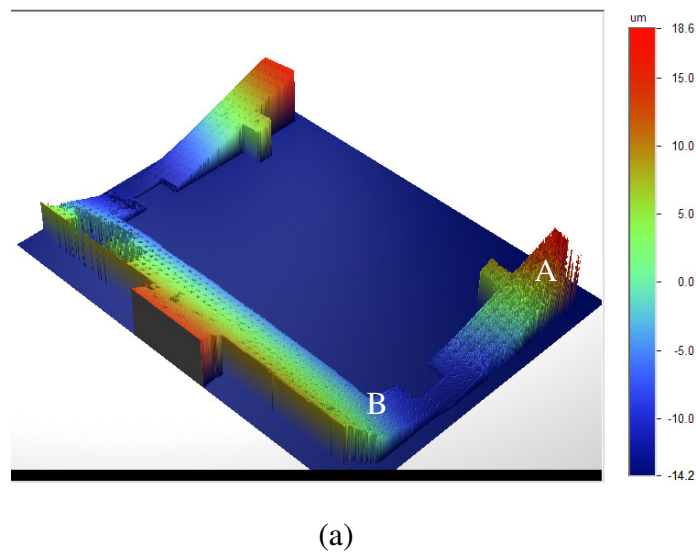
Bending of the supports after assembly, (a) 3-D profile.
